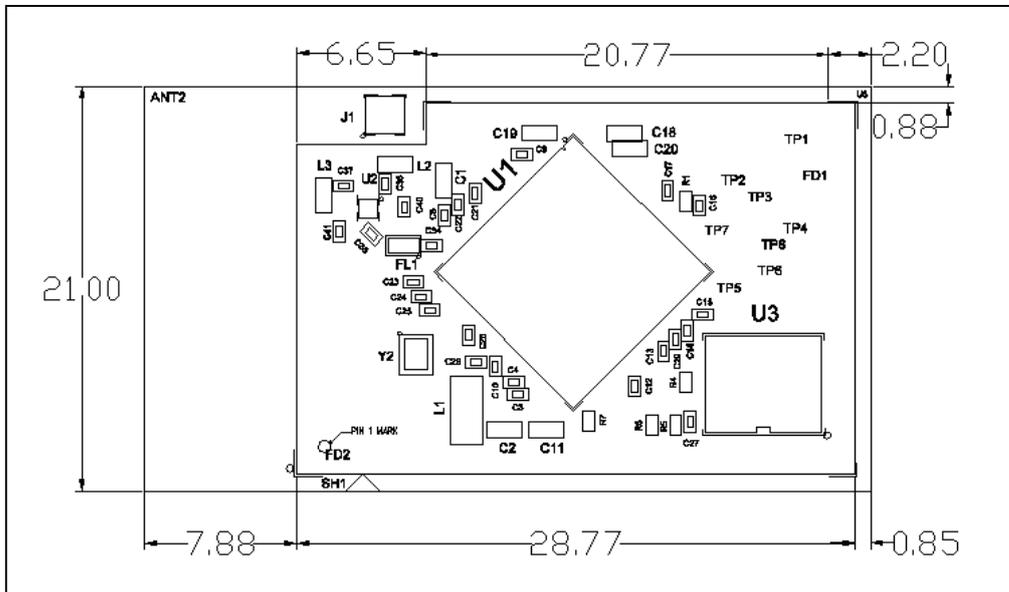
mw302 modules mechanical dimension (Unit: mm)
